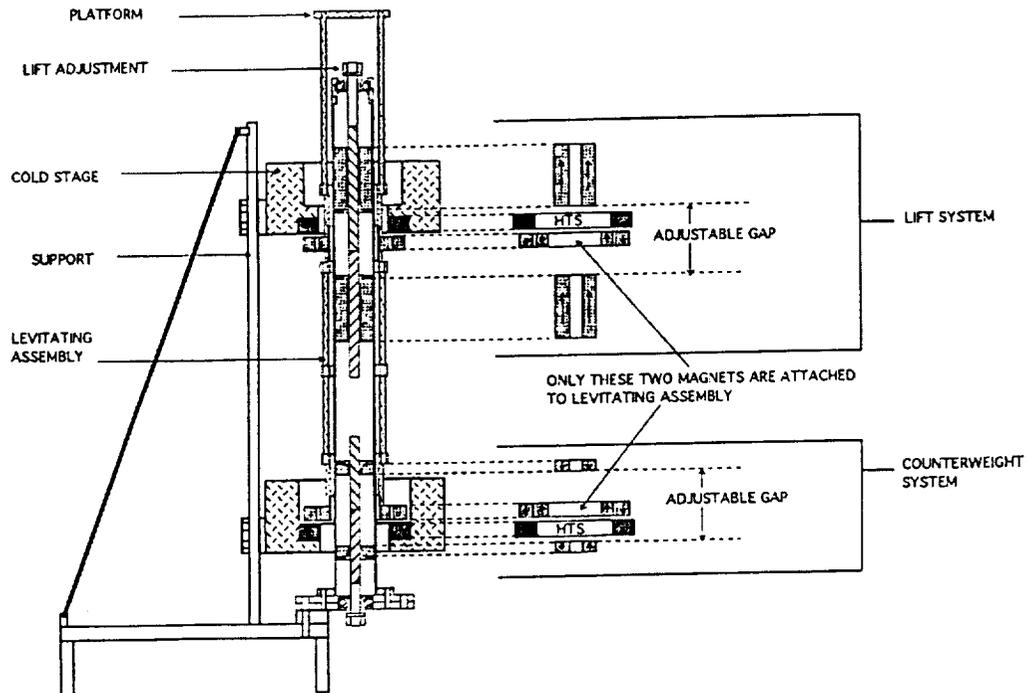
Schematic of the hybrid HTS-magnet bearings for a lunar telescope
